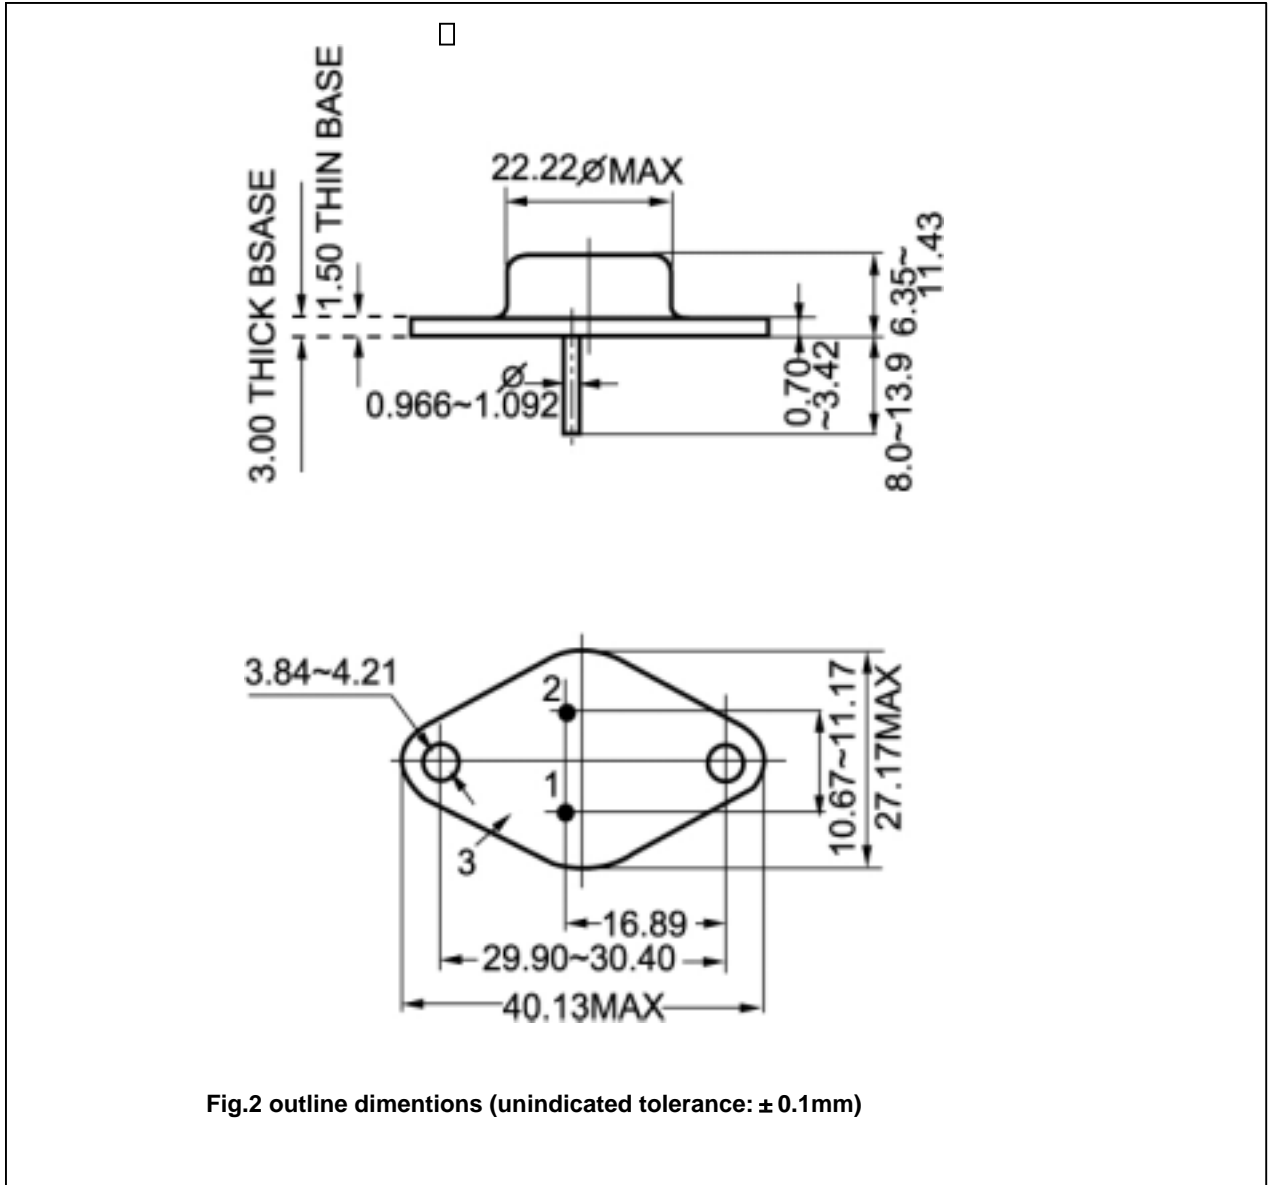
outline dimensions (unindicated tolerance: ± 0.1mm)
